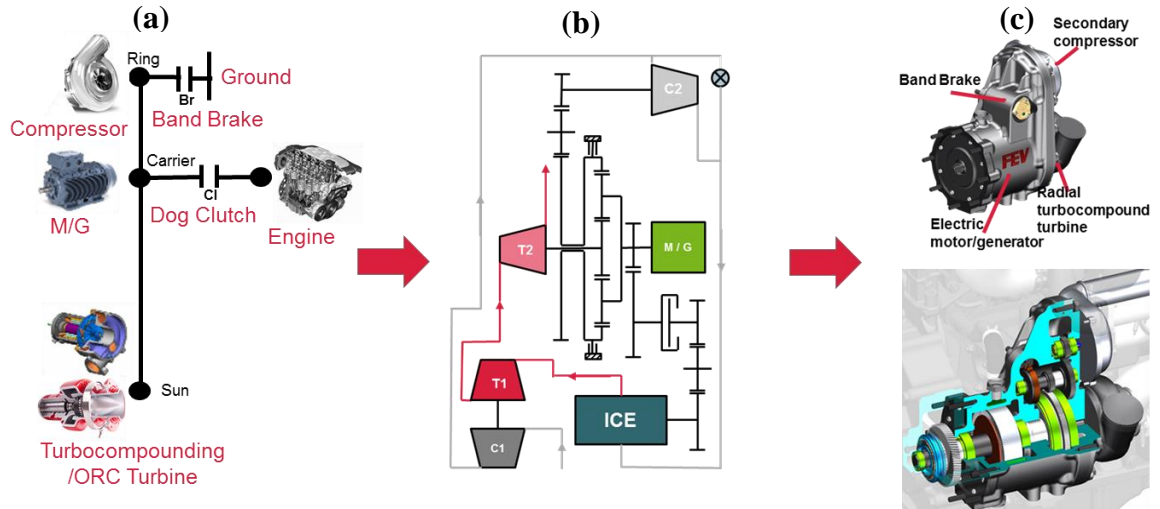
ITES system layout on planetary gear level diagram (a), with engine airpath (b) and in a cutaway section on engine (c)
